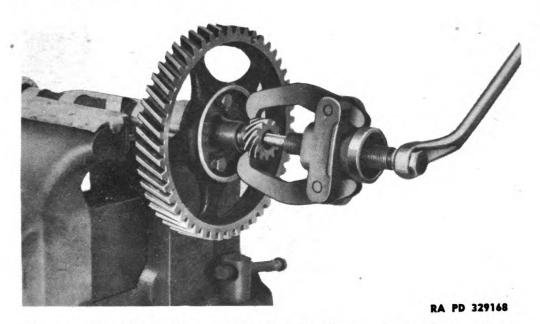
Removing Camshaft Distributor Drive Gear With Puller (41-P-2912)
